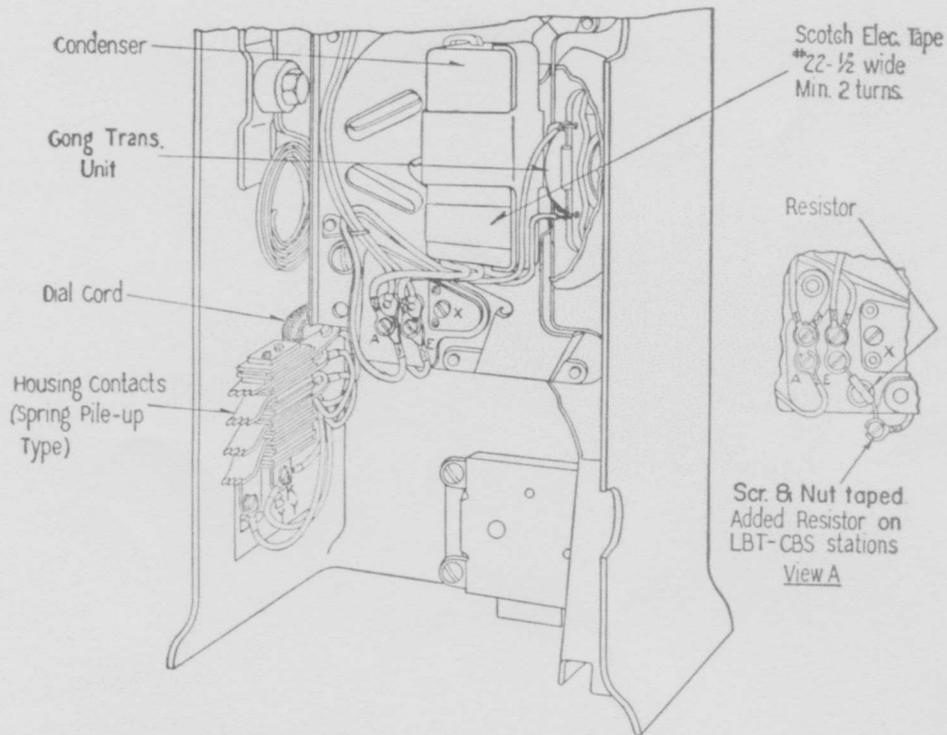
74, 174, or 177-type, or D-178940 Coin Collector Upper Housing
